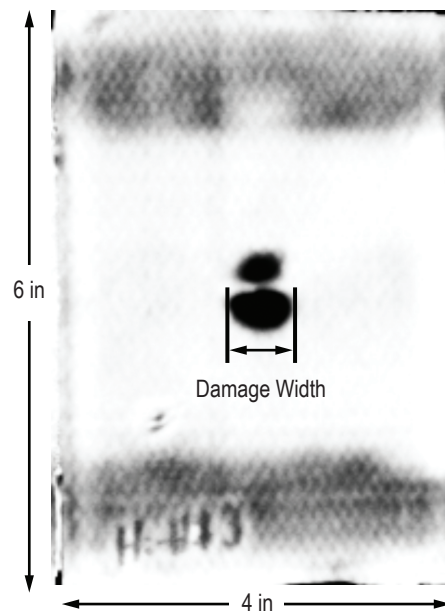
Flash thermography image of impact-damaged sandwich specimen with damage width noted.
